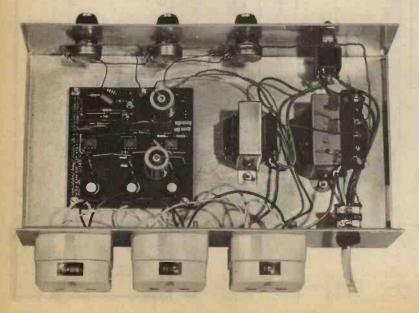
Component and wiring details of main board. The 0V line is not connected to chassis
